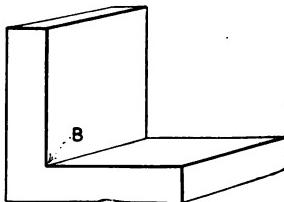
A piece of the shape shown must be provided with fillets before it can be cast
